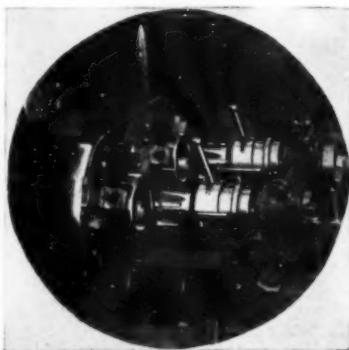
The larger the thread diameter, the more effective are the collapsible taps. Illustrated is a 3-3/4"-12 thread job. Material—S. A. E. 1020 steel forgings, well cleaned. With pitch diameter limits of .002", the actual threading time per piece is .0078 hrs.
